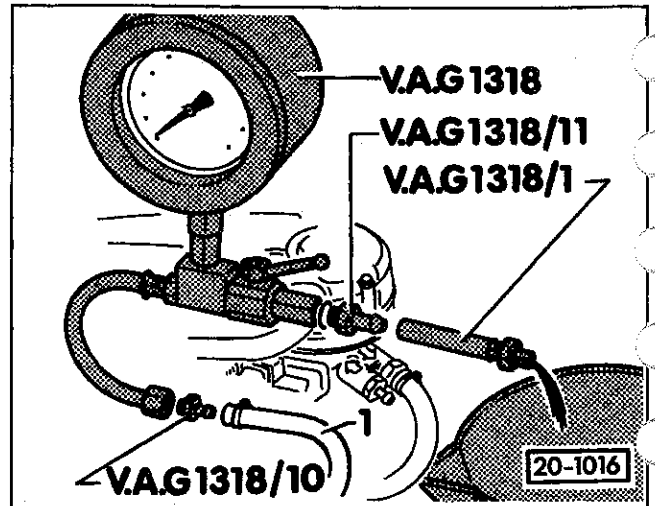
Fuel gauge hook-up on Mono-Motronic cars (ACC engine). Supply line shown at (1). Numbers are for VW special tools.
